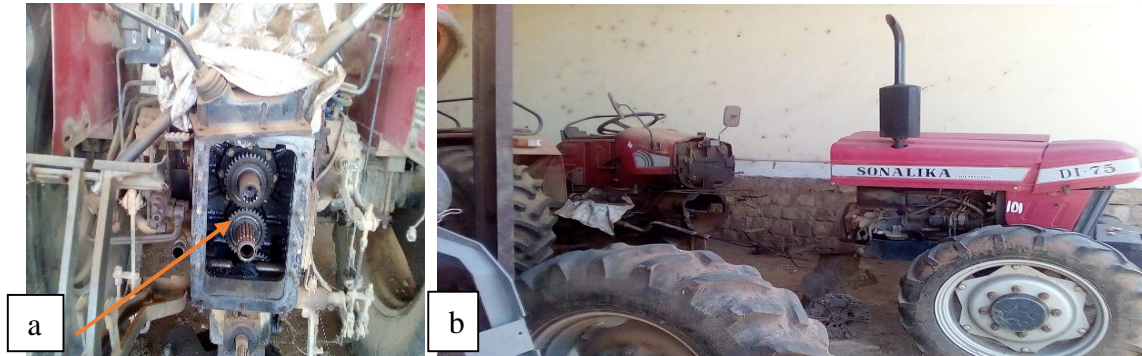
Illustration of gear box breakdown: a) Broken gears, b) Separation of engine from gearbox to change disc clutch and plates
